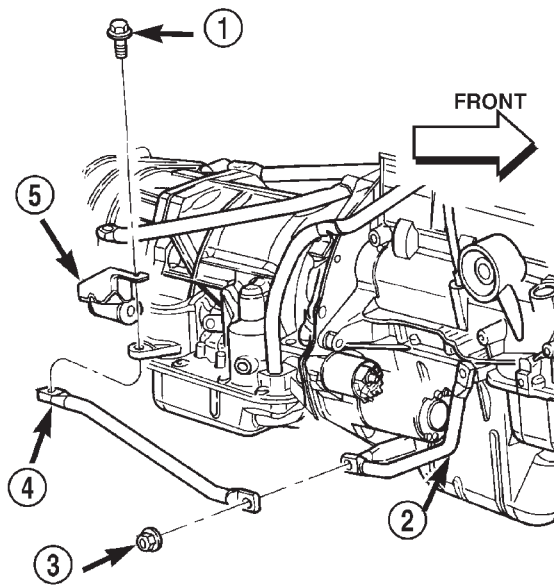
Transmission Bending Braces and Exhaust Hanger
